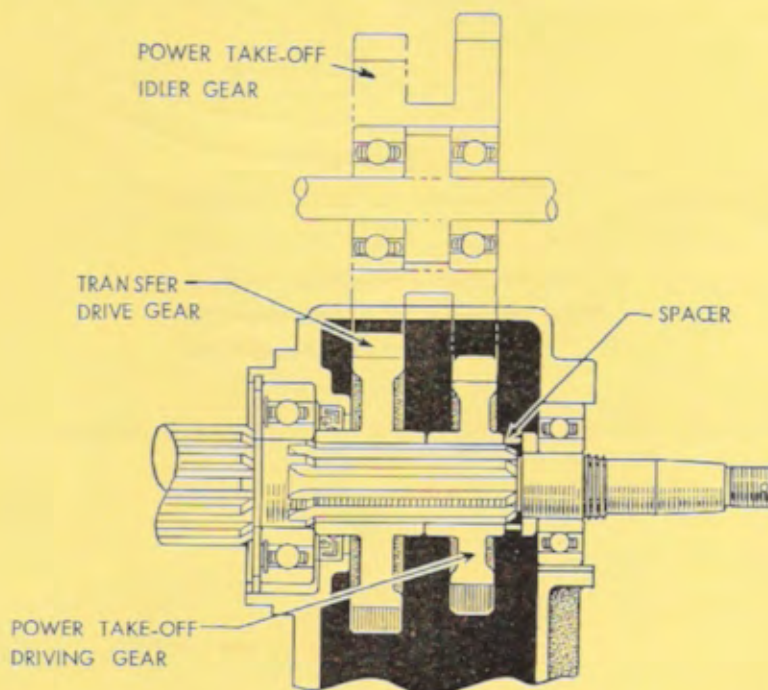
Installing Power Take-off Driving Gear and Spacer.
